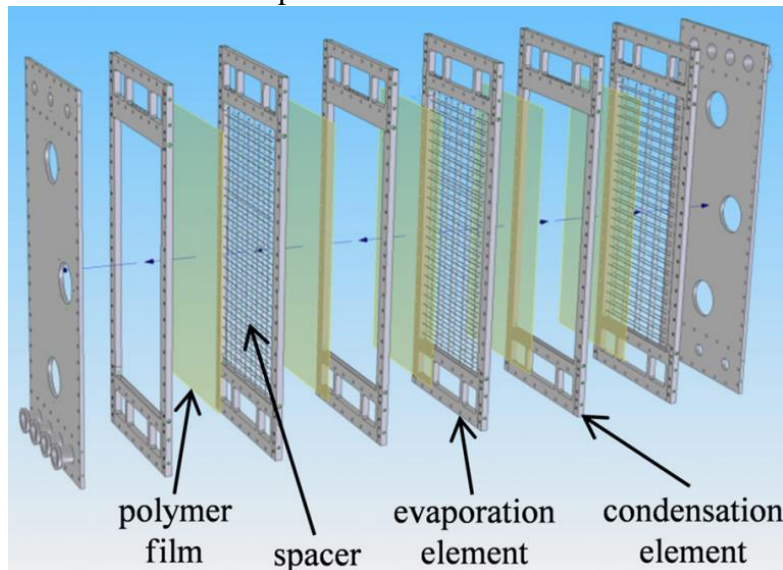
Exploded assembly drawing of the falling film plate heat exchanger with PEEK film heat transfer surfaces and spacers⁷⁰
